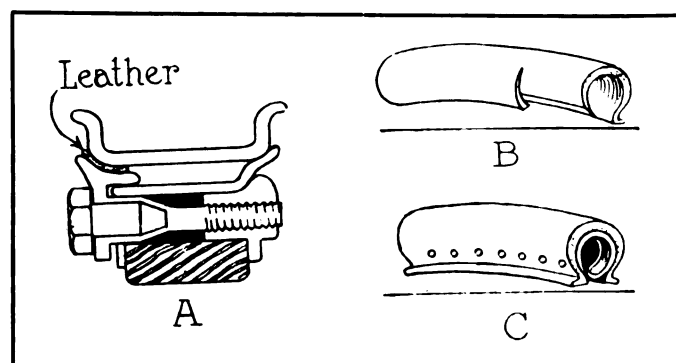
A, Silencing Noisy Tire Rim with Leather Strips; B, Tire Section Trimmed for Fitting to Shoe; C, Section Cemented and Riveted in Place.
